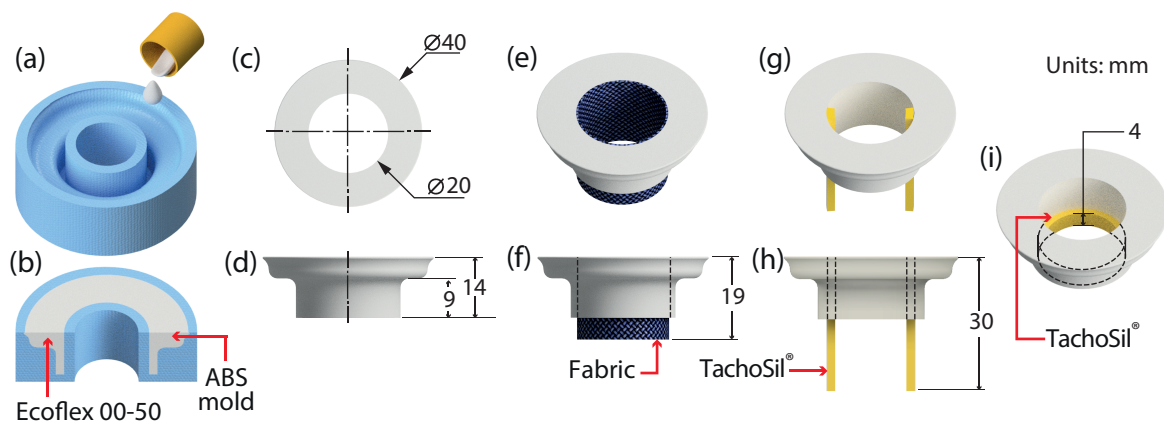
Fabrication process for the soft attachments. (a) Mold for casting of the soft attachments. (b) Cross-sectional view of the soft attachment inside the mold. (c) General top and (d) side dimensions of the soft attachments. (e) The attachment method using sutures. (f) General dimensions of the attachment with the embedded fabric for suturing. (g) Method using an FM: (h) General dimensions of the attachment with the glued TachoSil® strips used for rabbit and (i) pig tissue.
